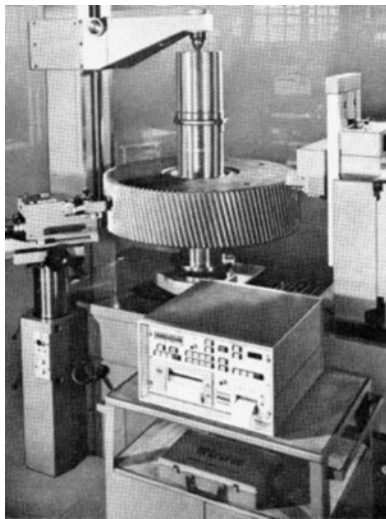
Gear-checking machine for large gears. Spacing, involute, helix, and surface finish are all measured on machines of this type. (Courtesy of Maag Gear Wheel Co., Zurich, Switzerland.)
